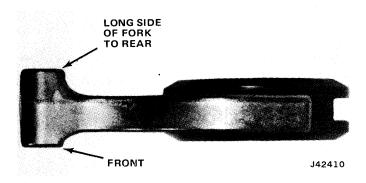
Shift Fork and Lockup Hub Assembly
